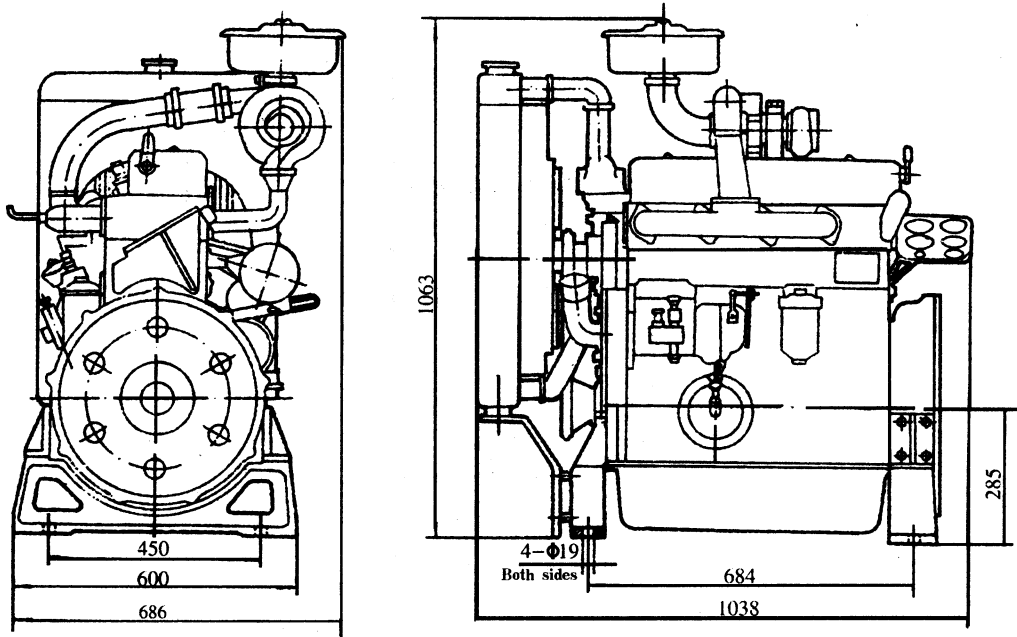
Outline drawing for 495ZD -1, 495ZD1 -1, 495ZD2, 495ZD3 diesel engine
